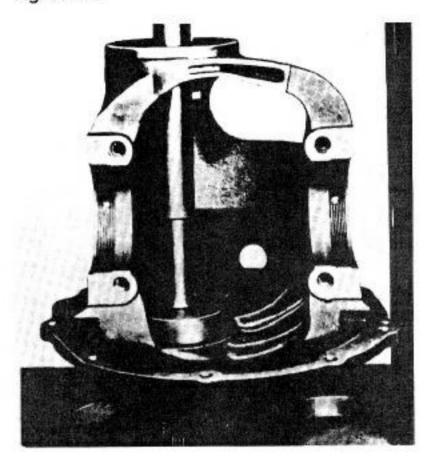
Seating outer race of pinion tapered-roller bearing in differential carrier.
